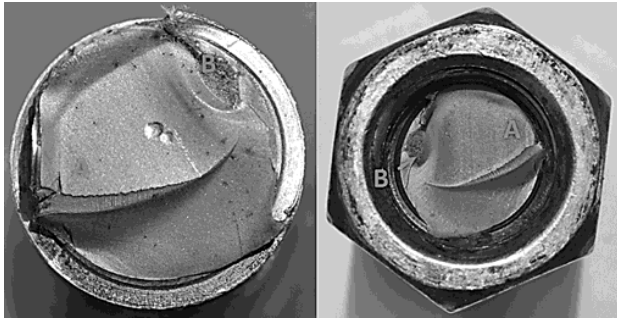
View of the fatigue fracture region of the shaft I - Model A3300
